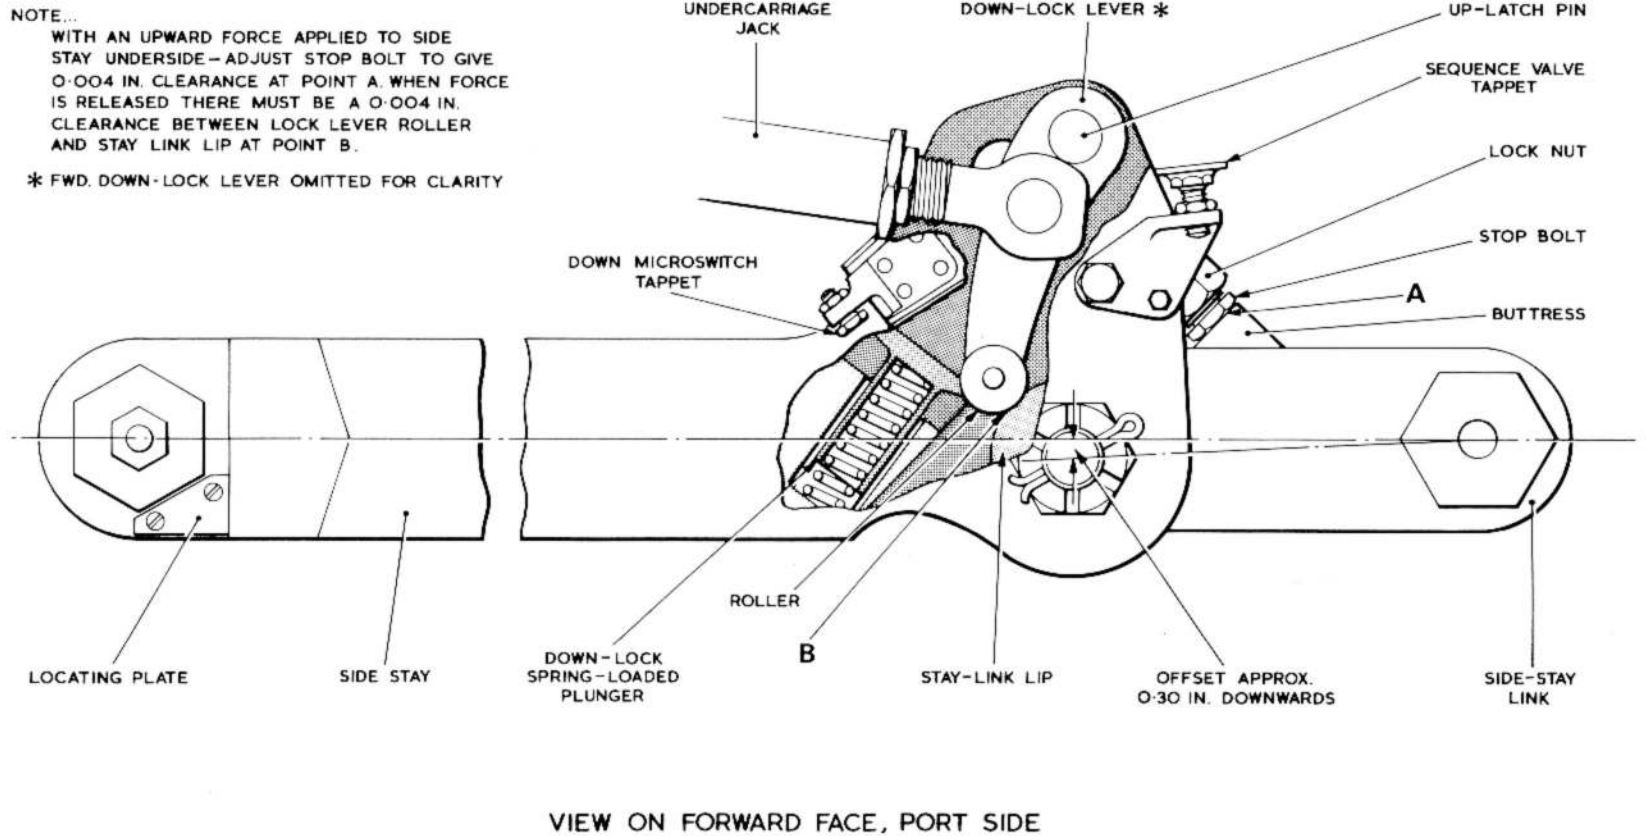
SIDE-STAY AND SIDE-STAY LINK ALIGNMENT
